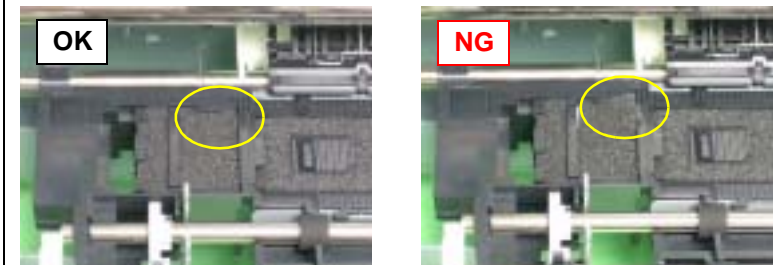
Reinstalling the Front Paper Guide Pad (2)
